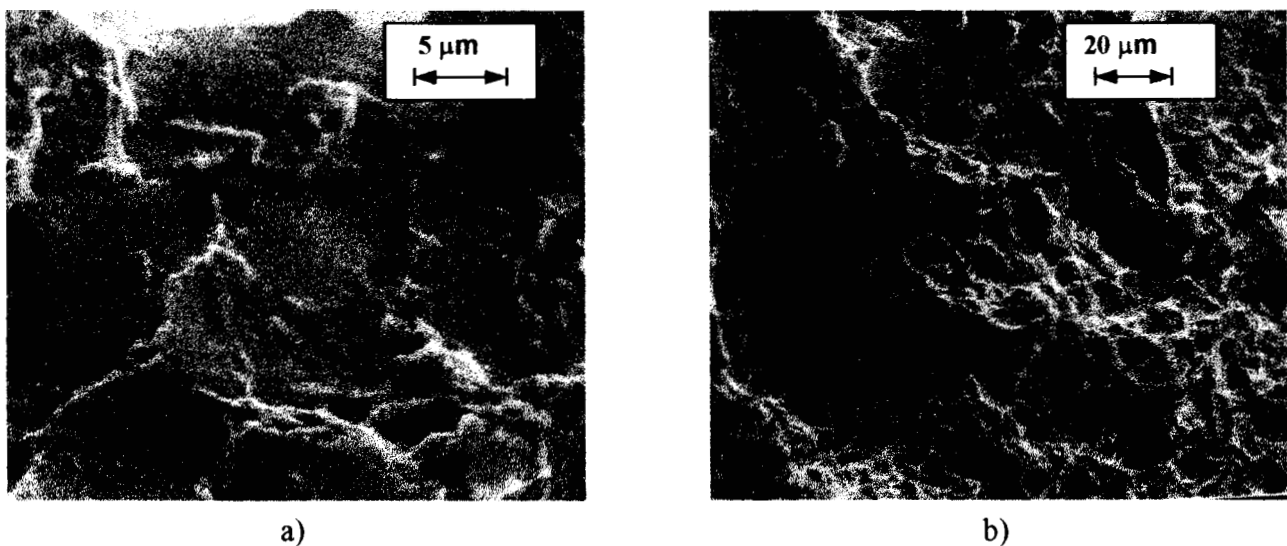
Faceted pattern (a) fracture surface and (b) area of the border between fatigue and fast fracture zones of the fatigued blade
